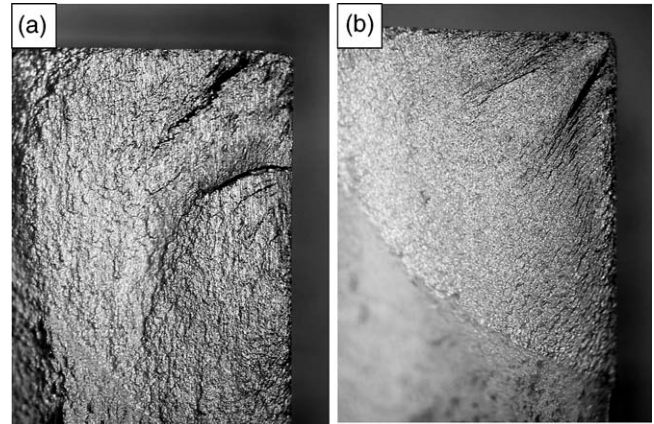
Macroscopic fractographs showing two specimens welded at 130 mm/min: (a) Left—specimen C9:  $N_f = 289,000$  at  $\sigma_{\text{amplitude}} = 125.0$  MPa; (b) right—specimen C27:  $N_f = 246,700$  at  $\sigma_{\text{amplitude}} = 140.2$  MPa.
